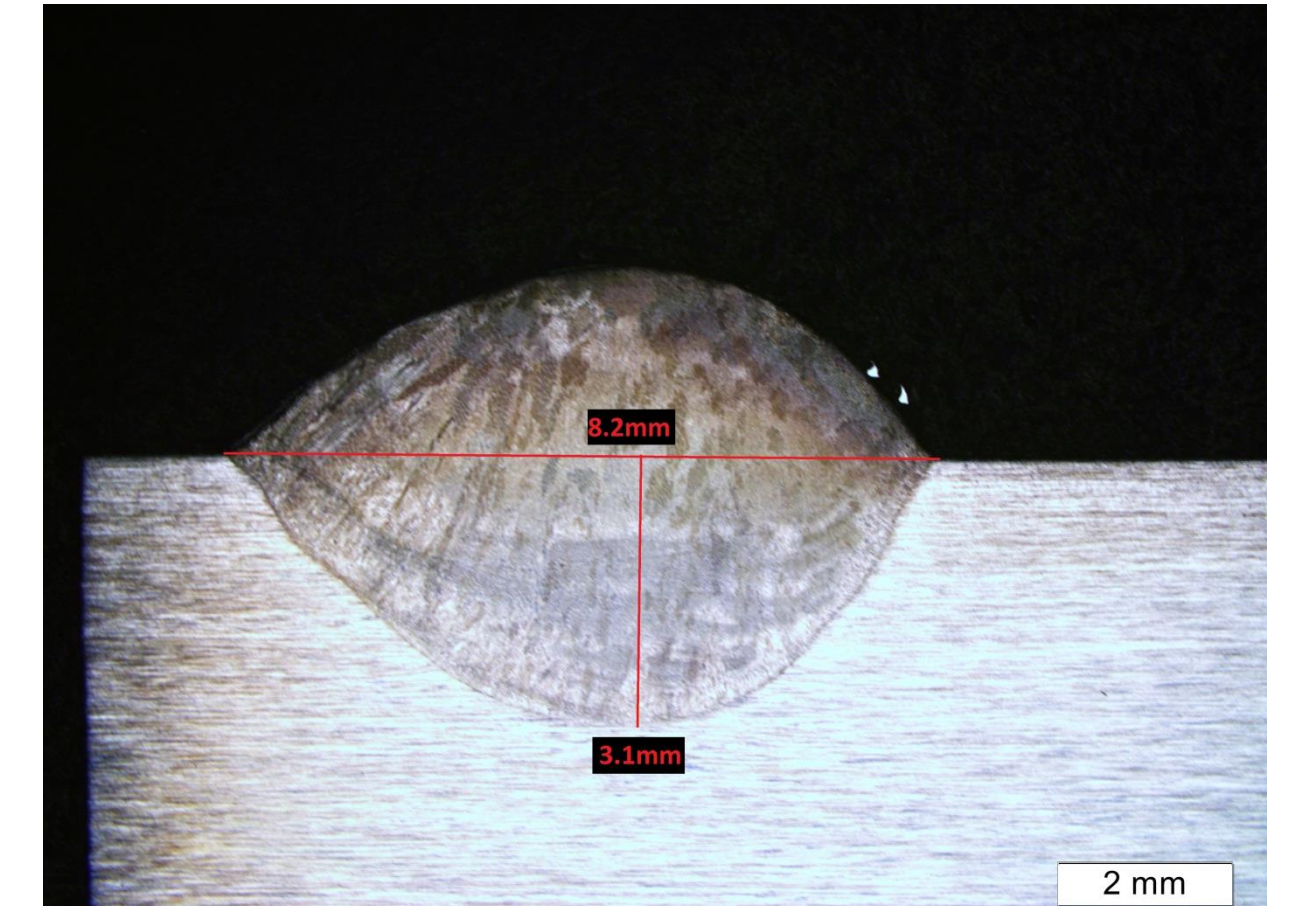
Weld with 308L SS7 DeepTIG Filler Wire
